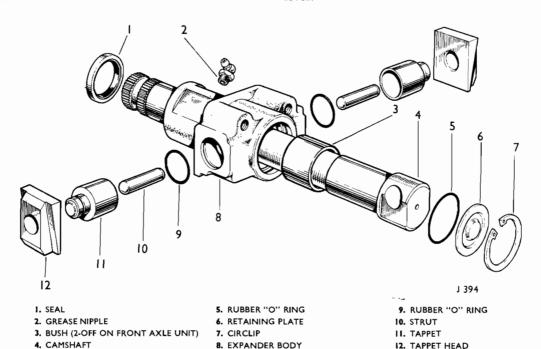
Brake operating shaft and expander unit—Girling late type.
